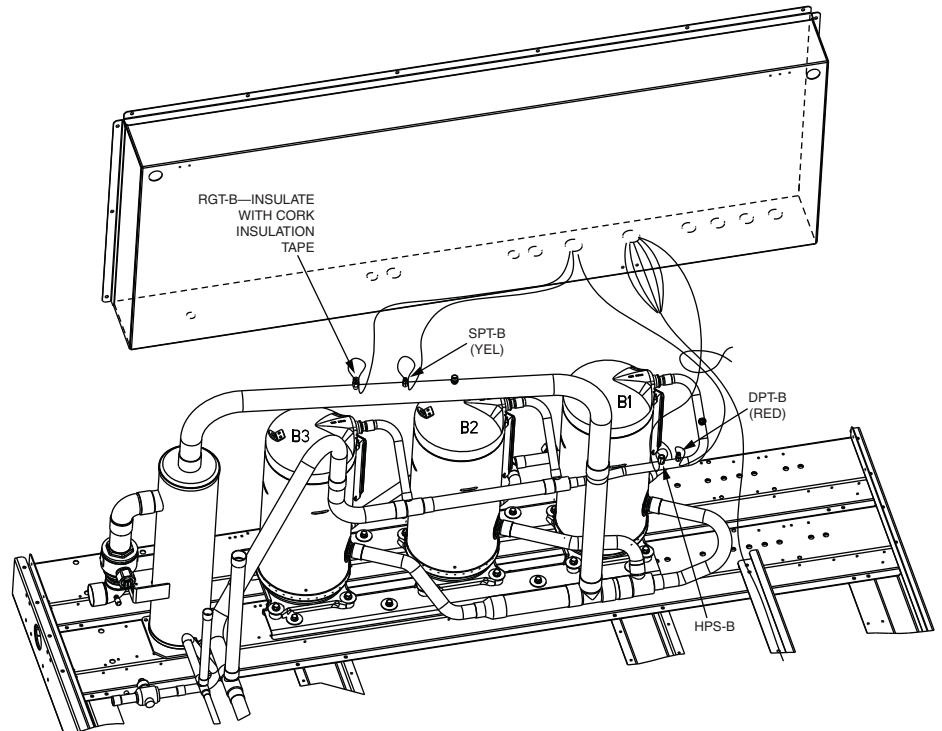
38APD070 Sensor Locations, Circuit B
